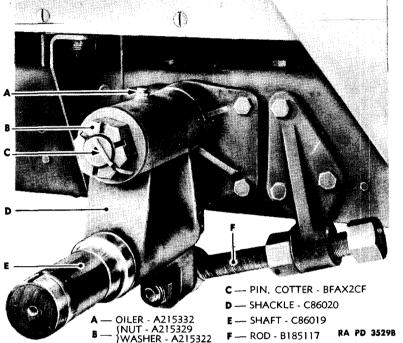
Track Adjusting Idler Shaft and Bracket—Installed
